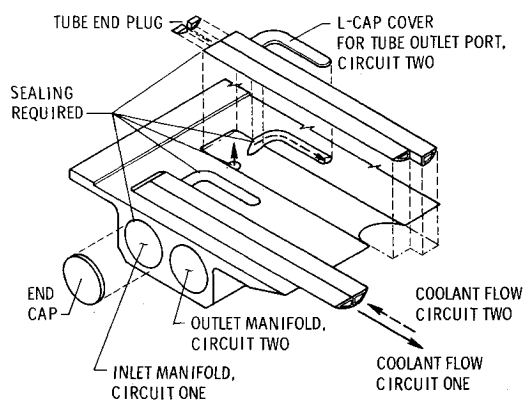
Details of manifold assembly for stiffened skin, redundantly cooled concept.
